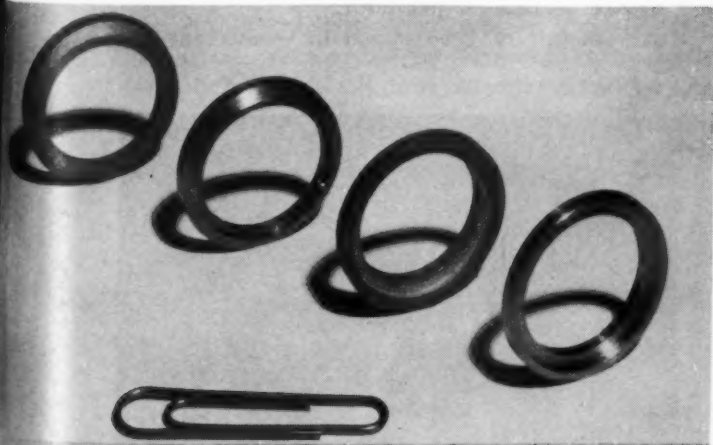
Sintered blanks for watch weights (first and third from left) require only light finish machining
